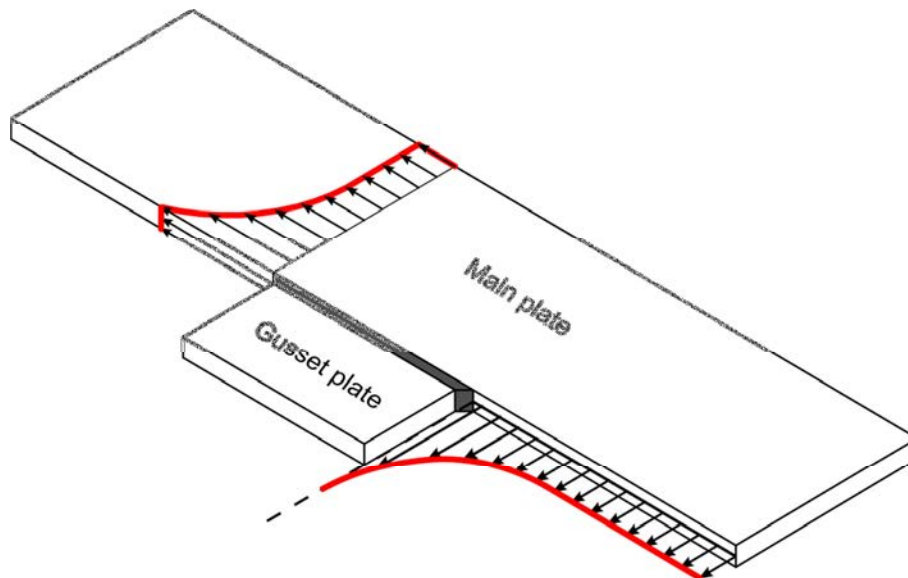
Stress distribution at the weld toe in plate edge joint
